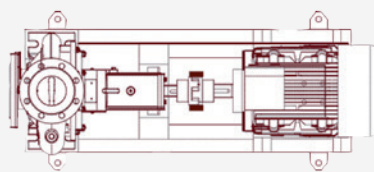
Parallel Shift Failure in Horizontal Plane
